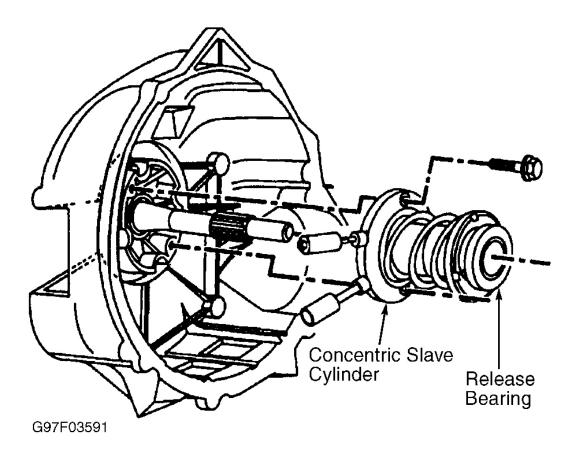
Identifying Concentric Clutch Slave Cylinder Courtesy of GENERAL MOTORS CORP.
